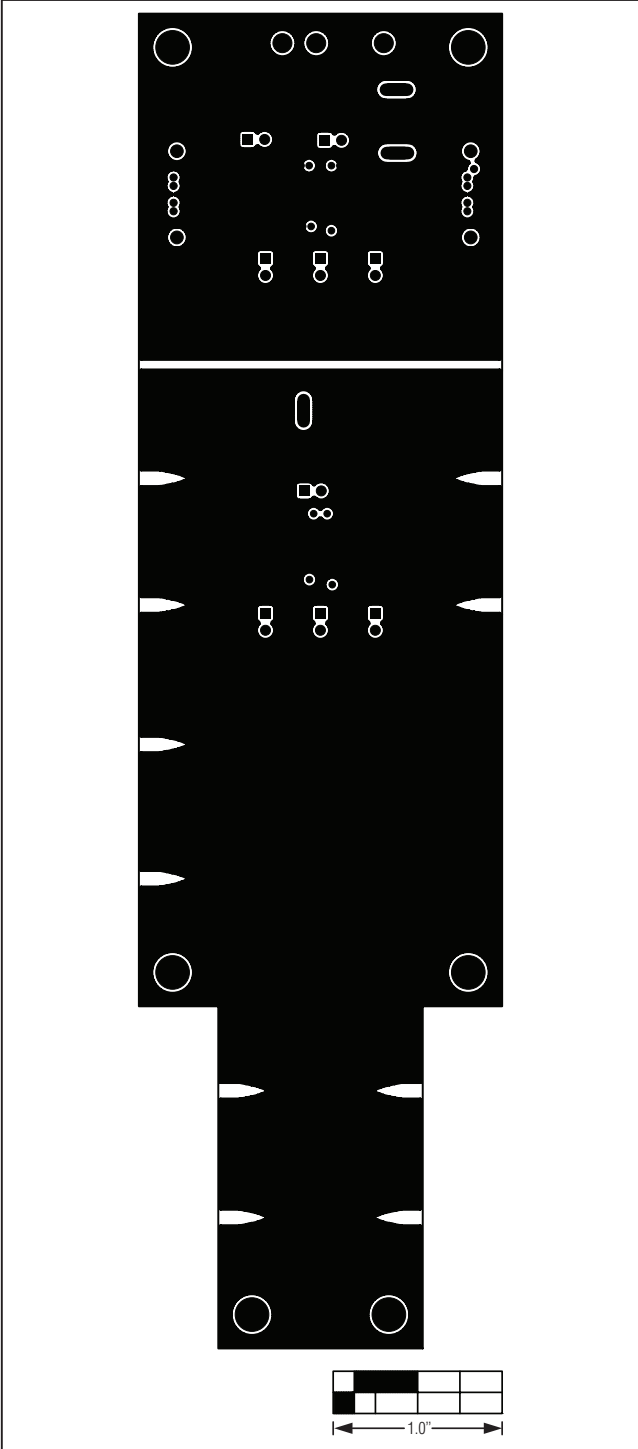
MAX4951AE EV Kit PCB Layout—Inner Layer 2
